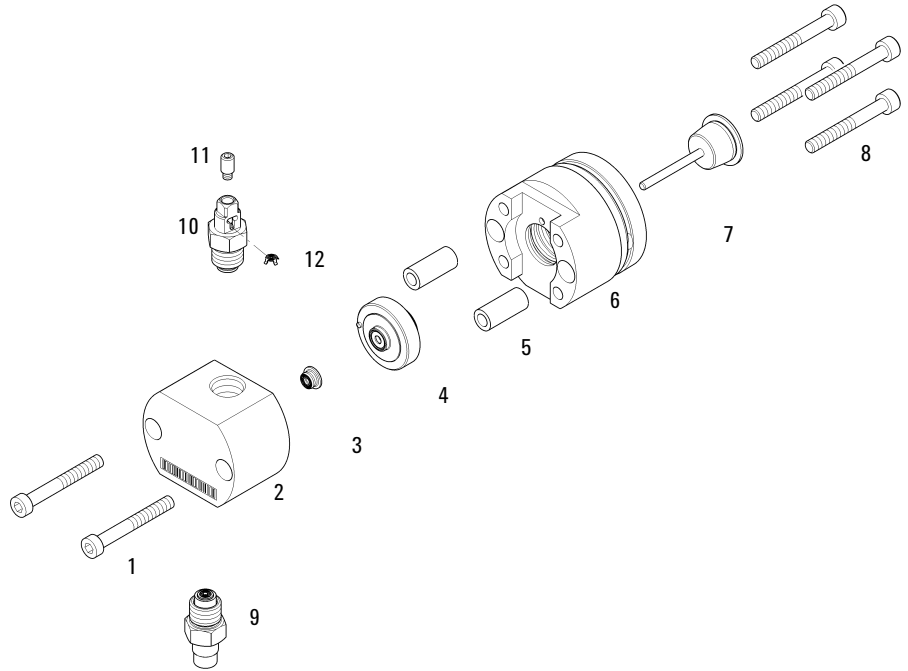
Primary pump head (Quaternary Pump) with seal wash
